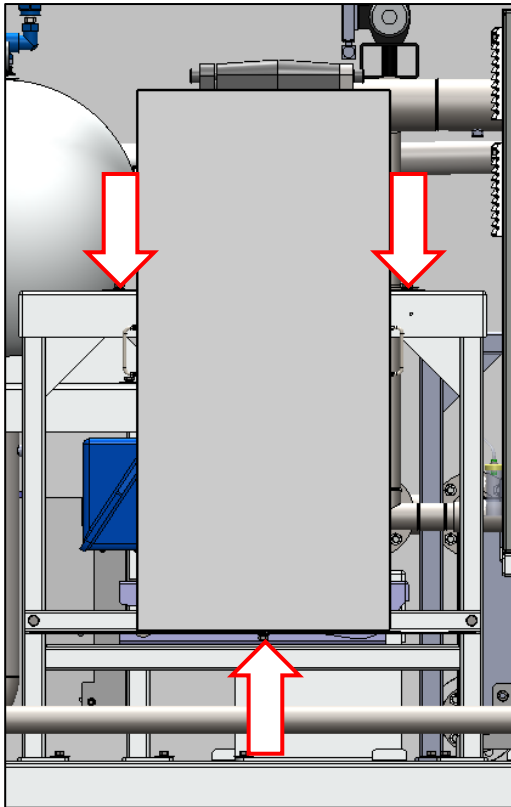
BELT SHROUD MOUNT BOLTS
